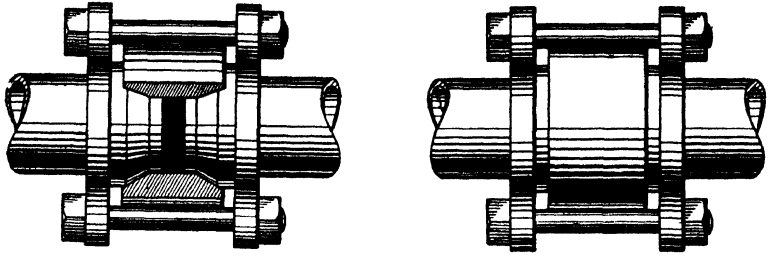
TYPE FC FLEXIBLE COUPLING ASSEMBLY PRODUCED IN THE FOLLOWING SIZES 1 in., 1½ in., 2 in., 2½ in., 3 in. and 4 in.
